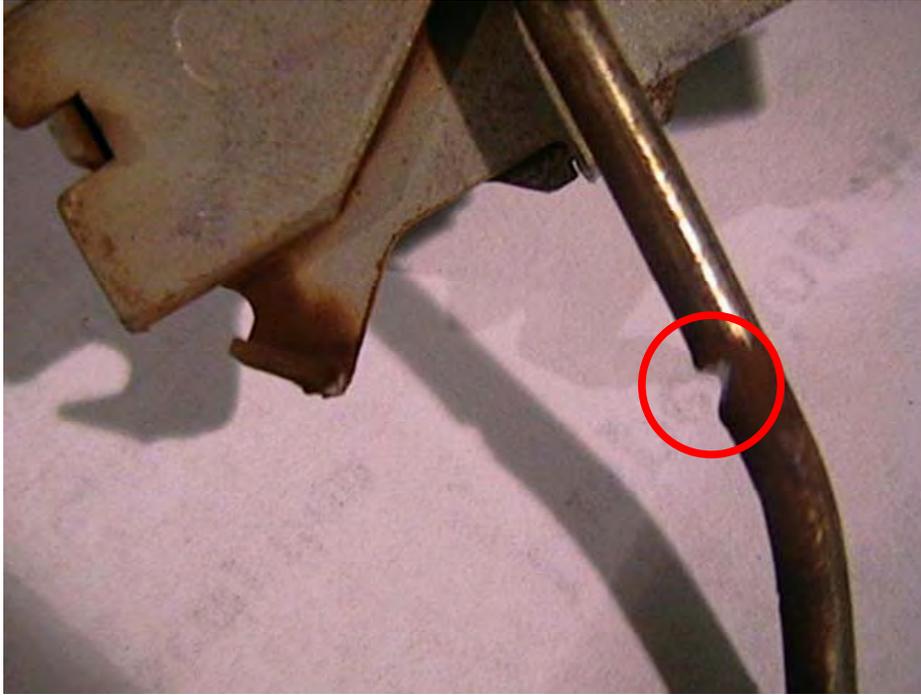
Worn Fuel Gauge Assembly Float Arms All Wing Fuel Cell Gauge Locations
